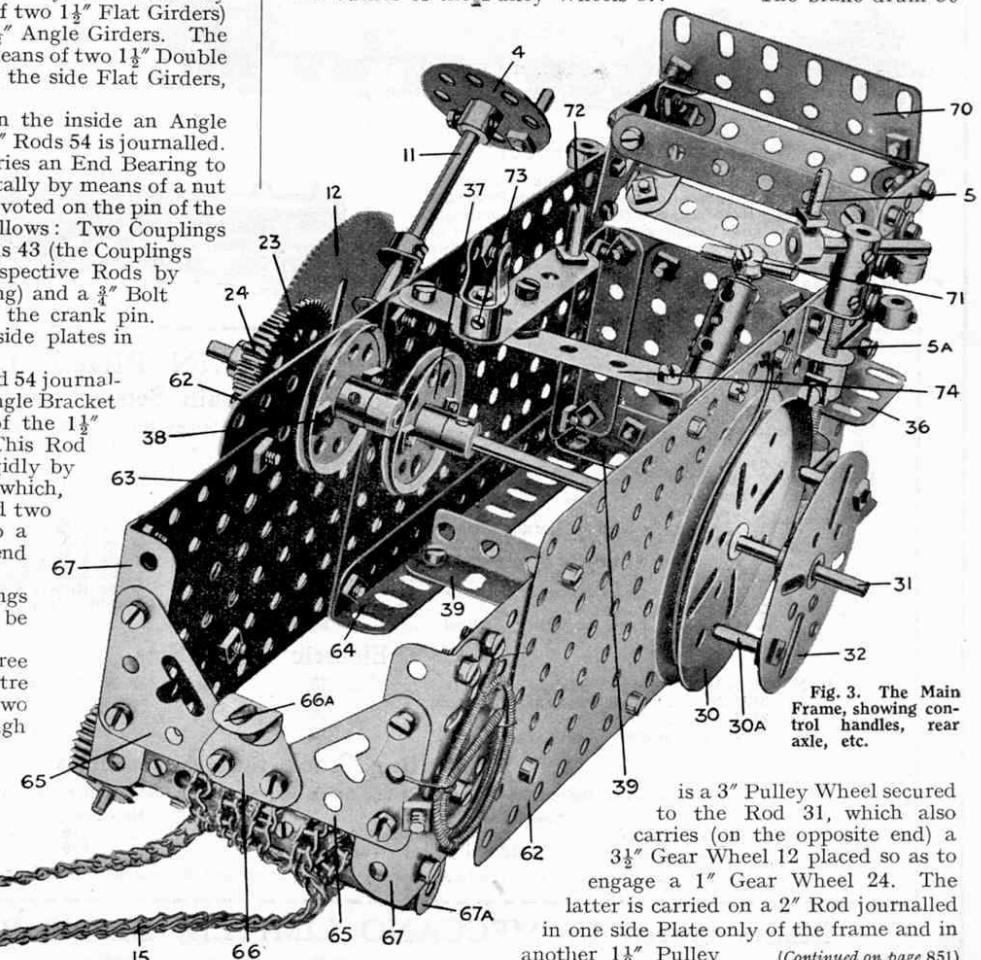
The Main Frame, showing control handles, rear axle, etc.
